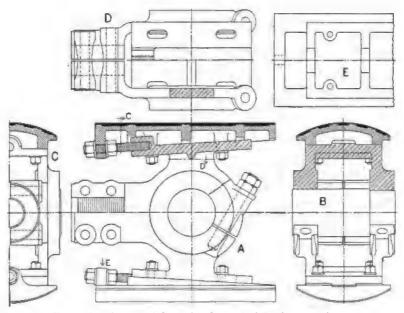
Cast-steel Cross-head, vertical Buckeye engine.
